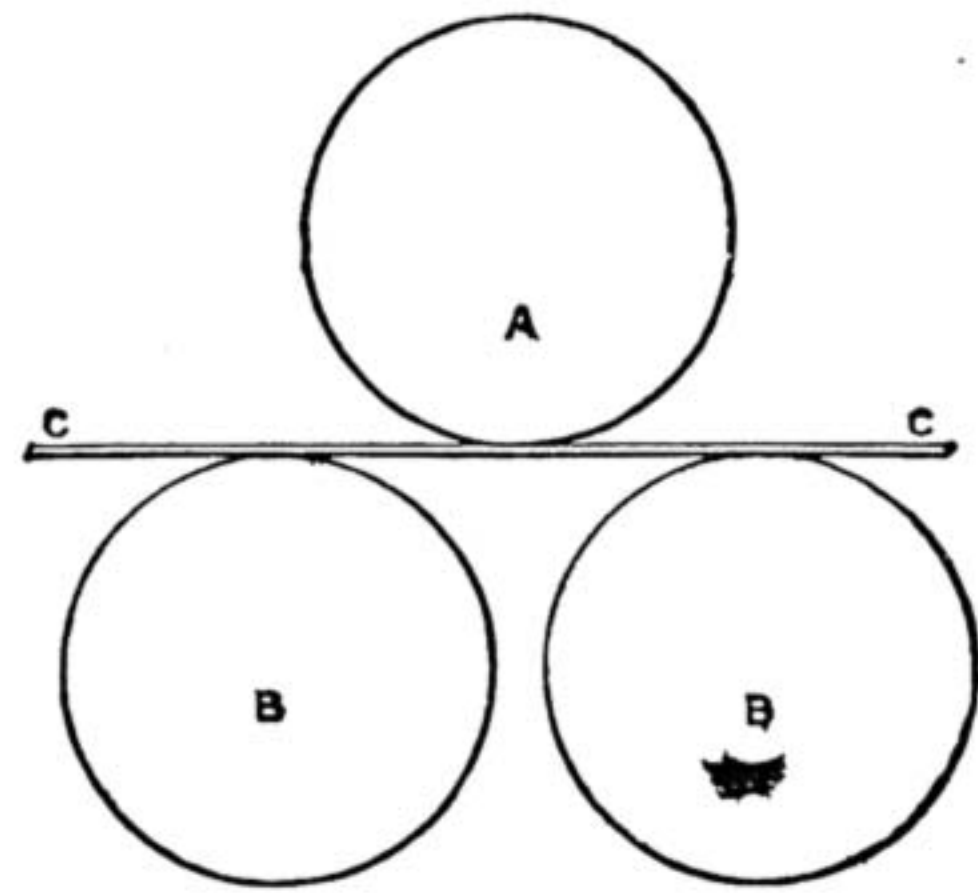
Arrangement of Rolls in Plate-Bending and Straightening Machine.
